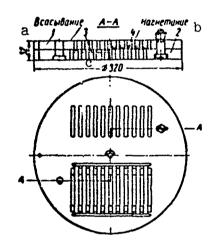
Valve of first stage: 1) lower board; 2) upper board; 3) plate of intake valve; 4) plate. a) Intake; b) delivery; c) diameter.
